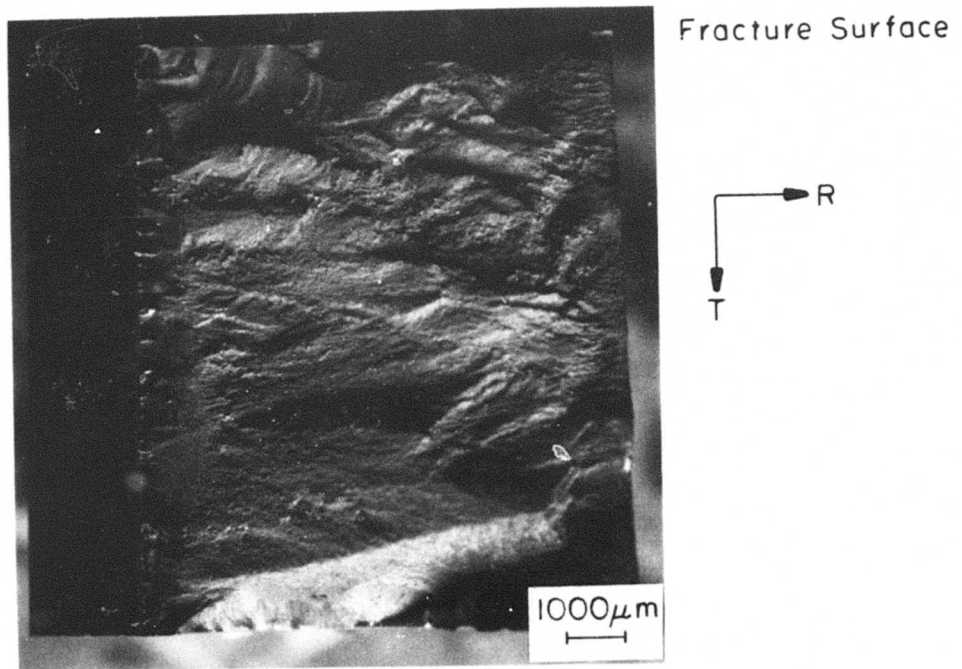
Alloy 227, sample 7ELR11. Fracture surface X8.
